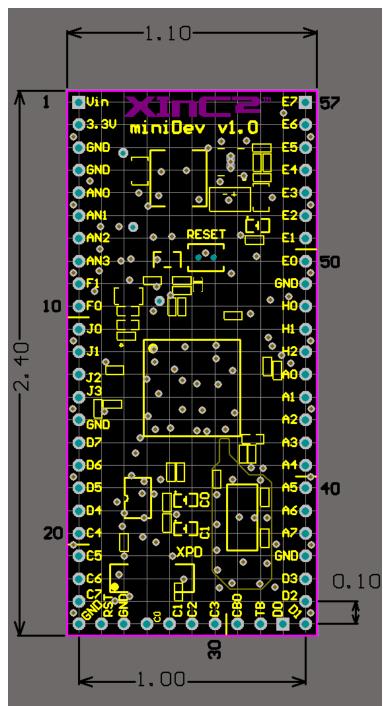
XInC2 miniDev board pinout. Dimensions in inches.
